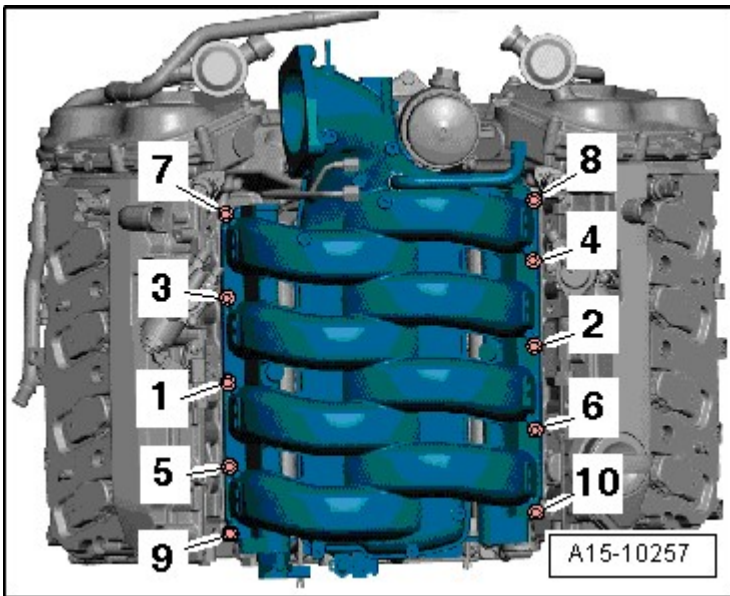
Identifying Intake Manifold Bolts Removal/Tightening Sequence
